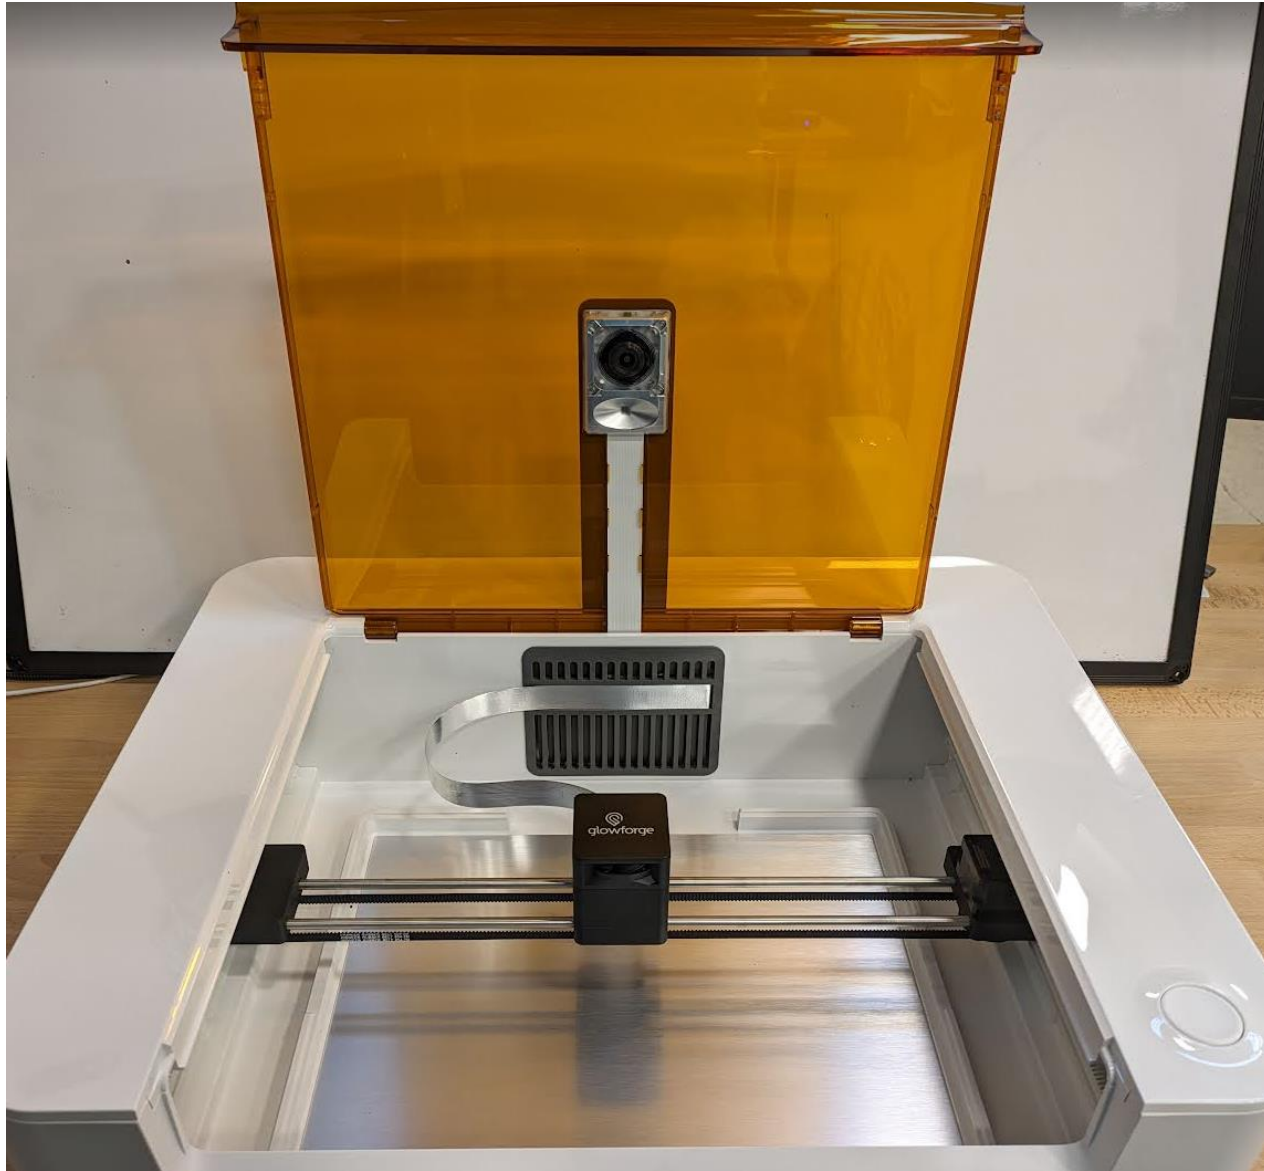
Inside of unit with Head and Lid PCBA Locations.
